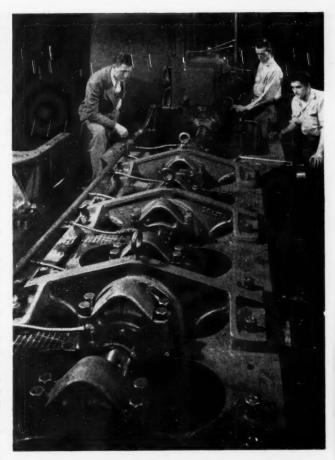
Boring main bearing holes in the Diesel engine bed, using a Giddings & Lewis horizontal milling machine and special fixture. The cutting tools are precision blocks, and the settings are controlled by a micrometer-graduated dial in each block.
